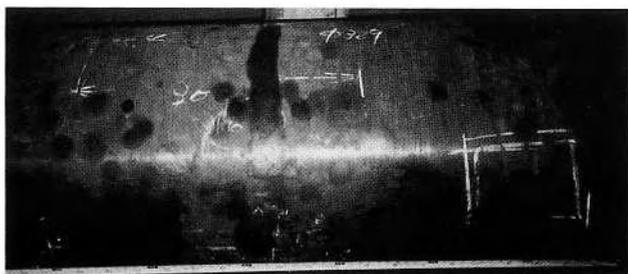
Surface of Runout Table Roller (deep corroded)
